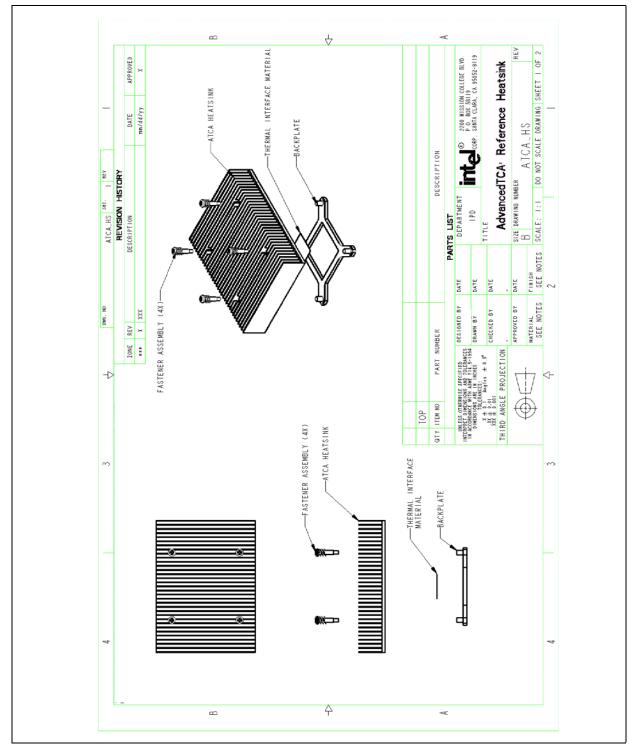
AdvancedTCA* Reference Heatsink Assembly
